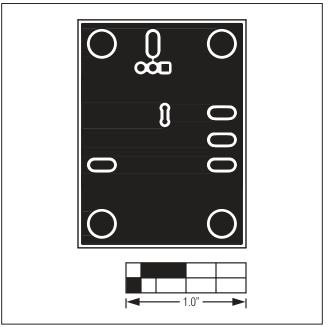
MAX9644/MAX9645/MAX9646 EV Kit PCB Layout— Solder Side
